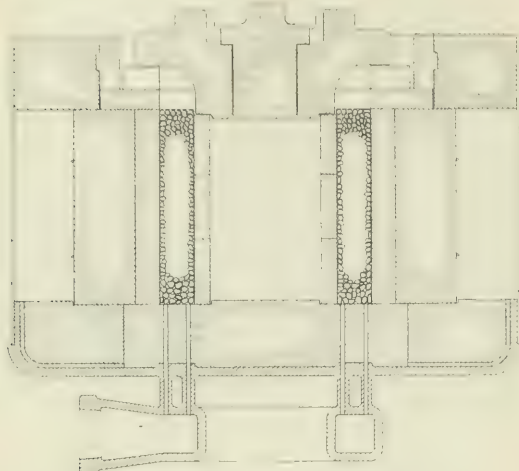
FIG. I—SURFACE COMBUSTION CRUCIBLE FURNACE
